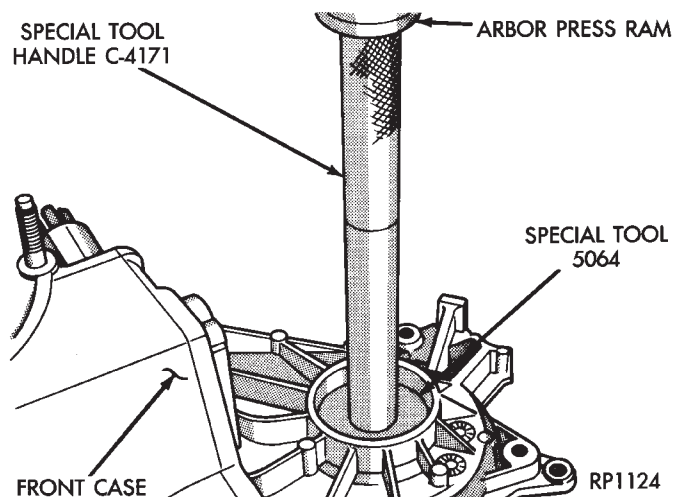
Installing Front Output Shaft Front Bearing In Case
